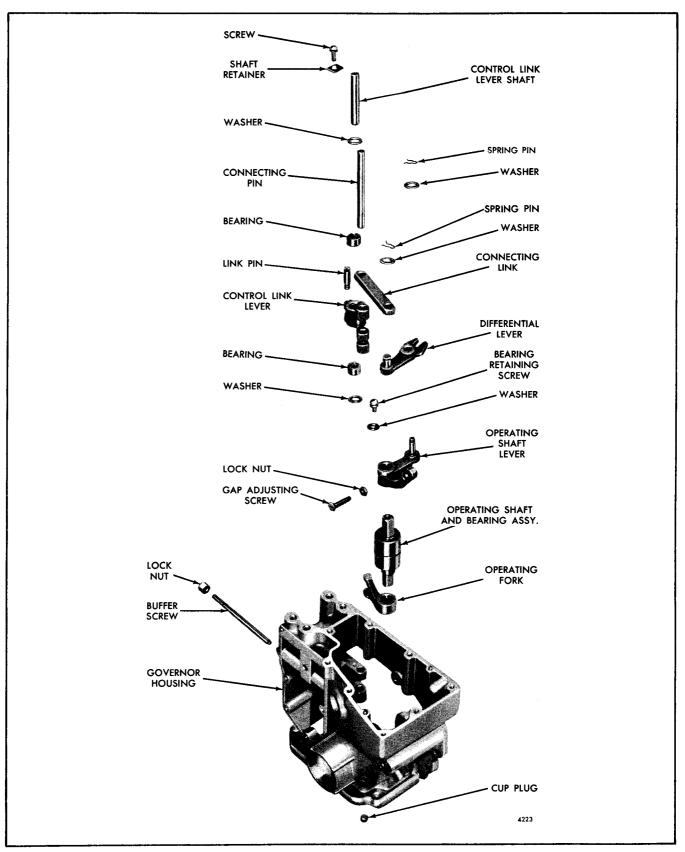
Governor Housing and Operating Shaft Details and Relative Location of Parts
